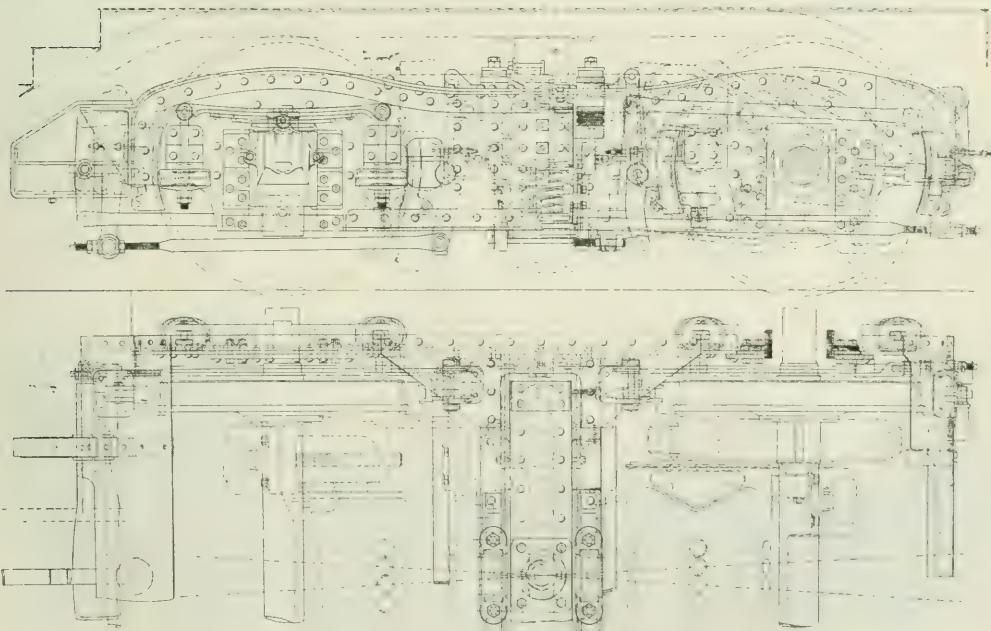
ELEVATION AND PLAN OF MOTOR BOGIE.
